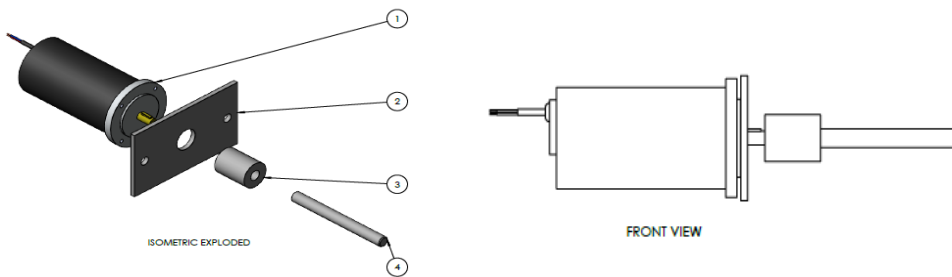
Computer-aided model of high-speed rotational actuation assembly
